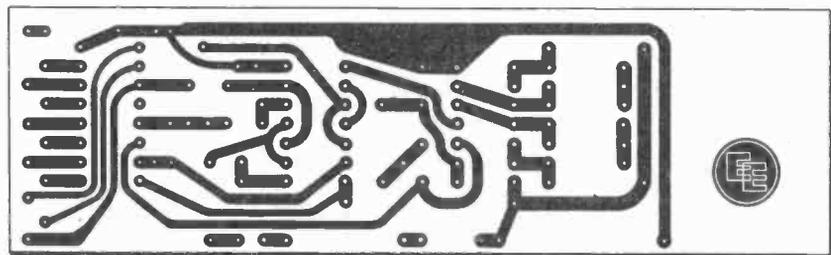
Circuit board layout and interconnecting diagram. Note that the foil pattern has been reproduced full size and is not to scale with the rest of the drawing.
